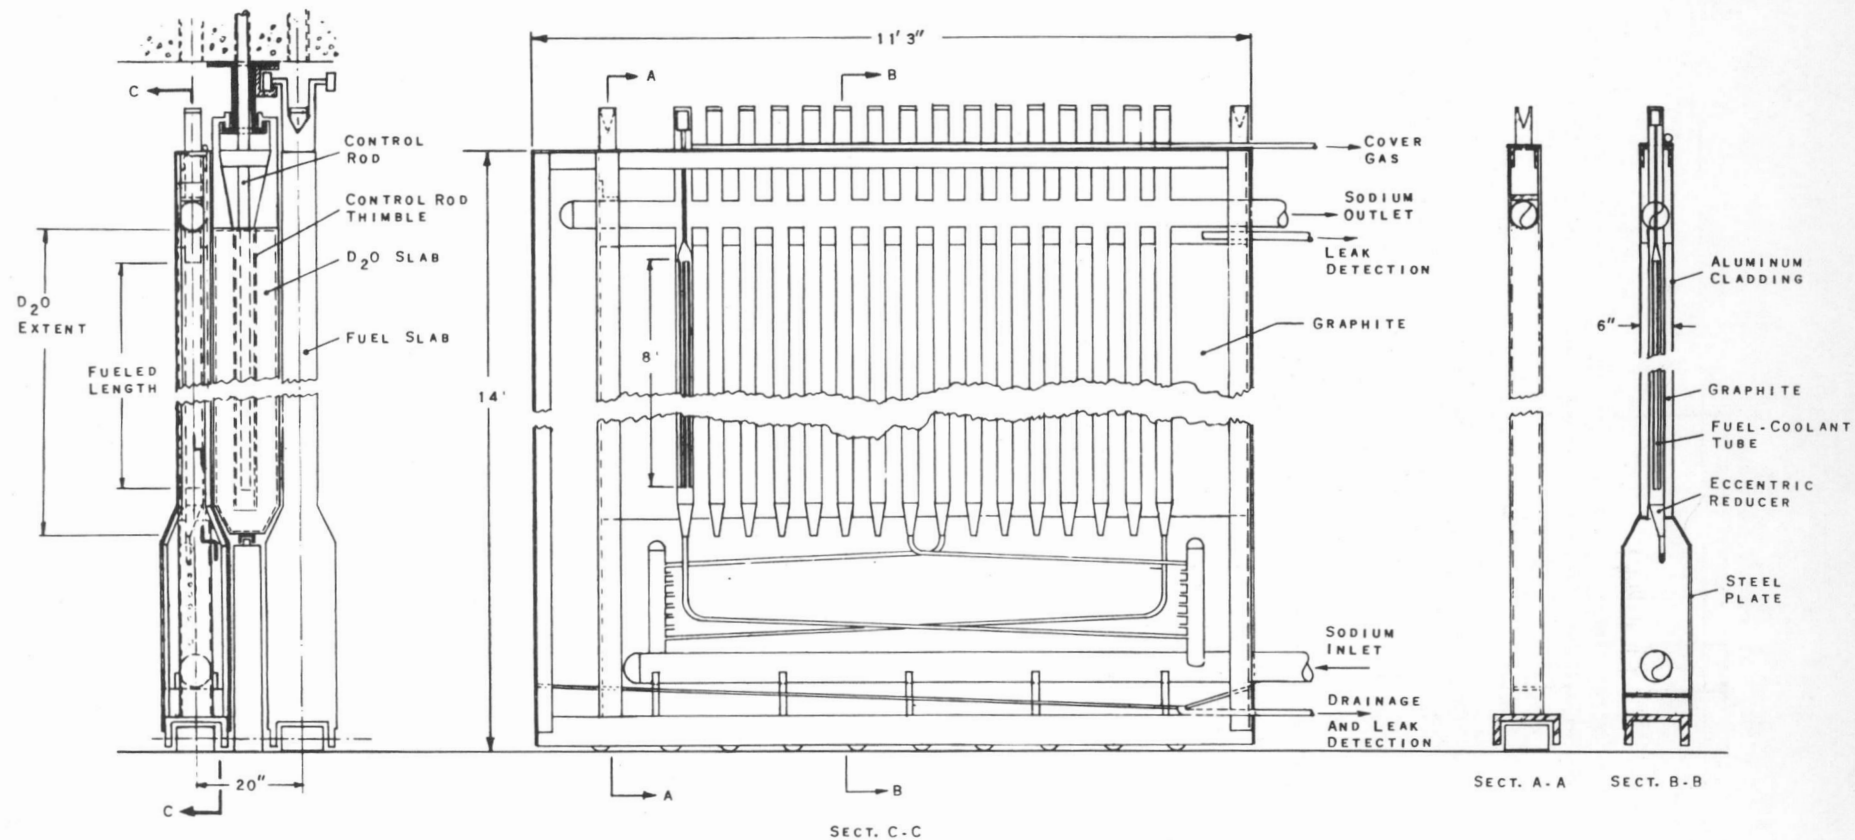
SDR — slab design — typical fuel slab
